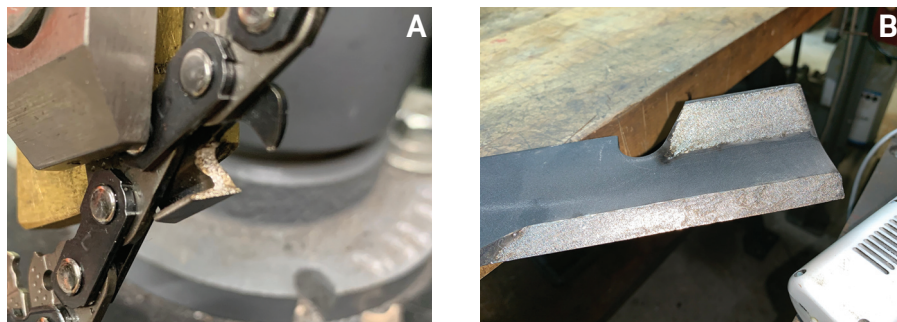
A — Coated chainsaw blade; B — coated cutting edge and deflector for lawn mower blades. (Courtesy of Pierce Design Tool.)
